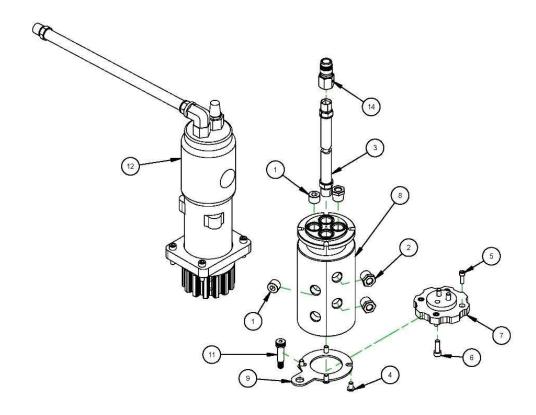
ID/OD CHUCK 45-120" FOR TURNING WITH MILLING ARM ASSEMBLY PARTS LIST (P/N 62666)
